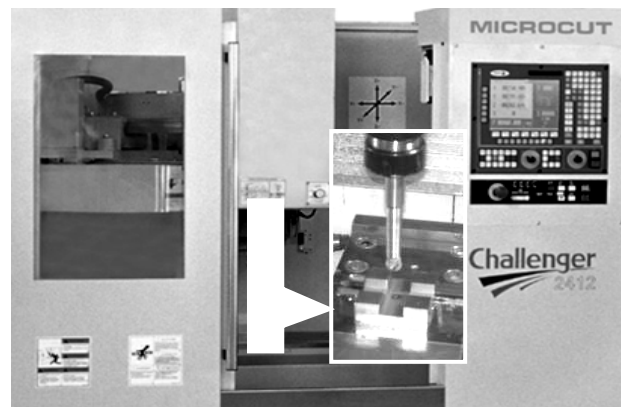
CNC 3-axes milling centre, tool and workpiece.
